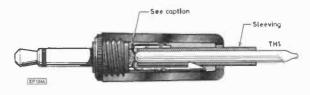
Cross-sectional view of temperature sensor assembly. A small piece of insulating material should be fitted at the base of the thermistor (TH1) to ensure that no short-circuits occur when the sensor is assembled
